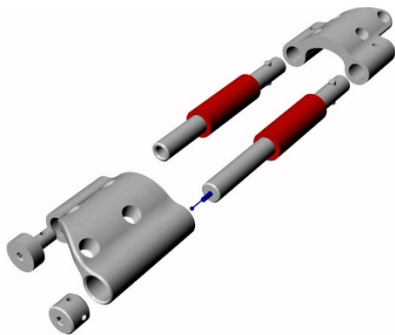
Exploded view of the internal fixator instrumented with a displacement transducer and polymer springs for passive dynamization of the fracture gap.
